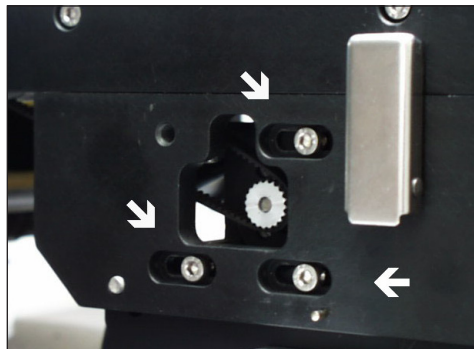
Motor fixation of the infeed or outfeed conveyor
